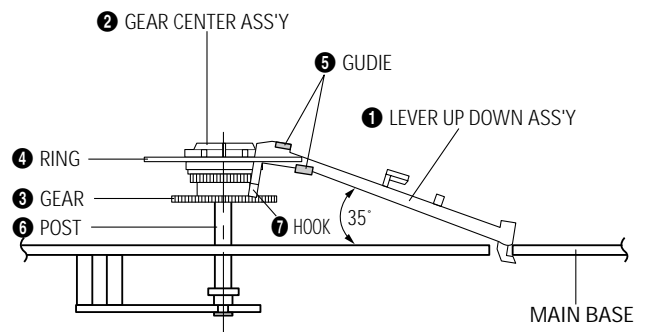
Assembly of Lever Up Down Ass'y, Gear Center Ass'y
